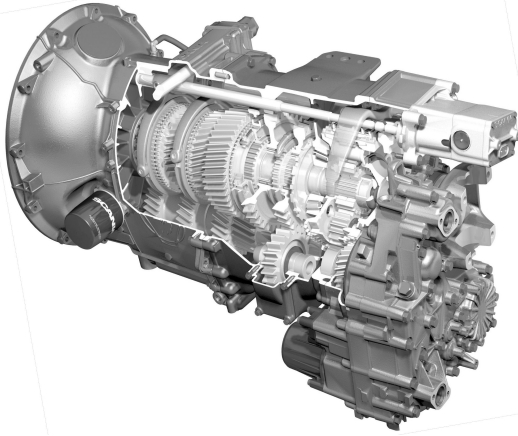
A gearbox with an integrated retarder. The retarder is visible on the bottom right of the gearbox.
